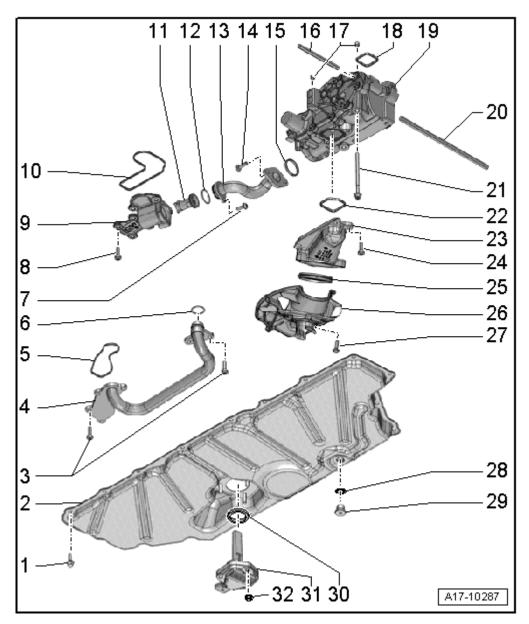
Identifying Oil Pump And Lower Oil Pan Overview Courtesy of AUDI OF AMERICA, LLC
